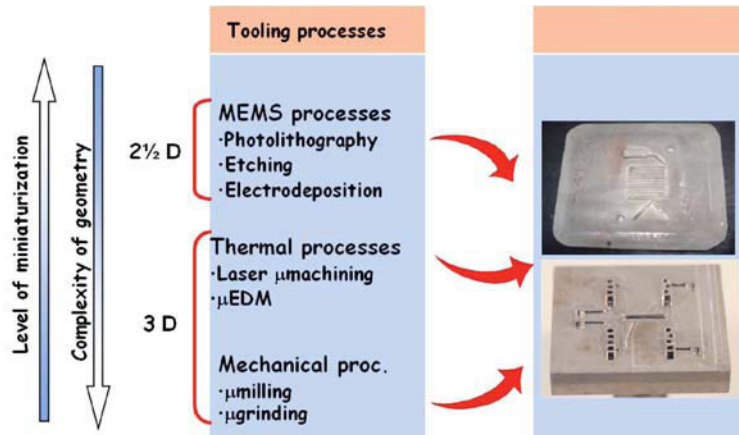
Example of mold-making technologies in micro-manufacturing.
